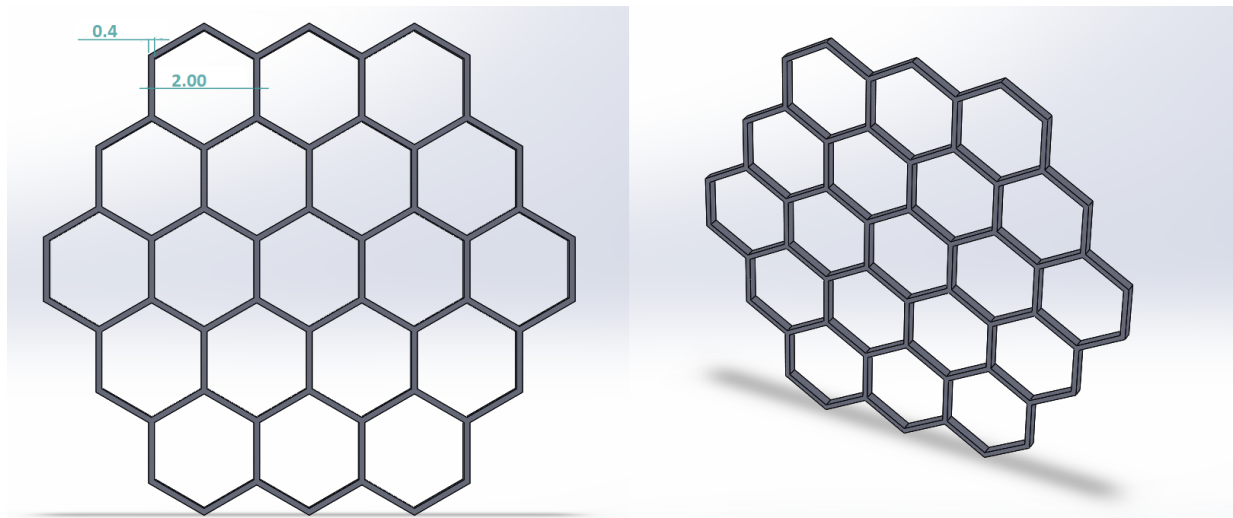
CAD model: 2D- view (left) and 3D-view (right)
